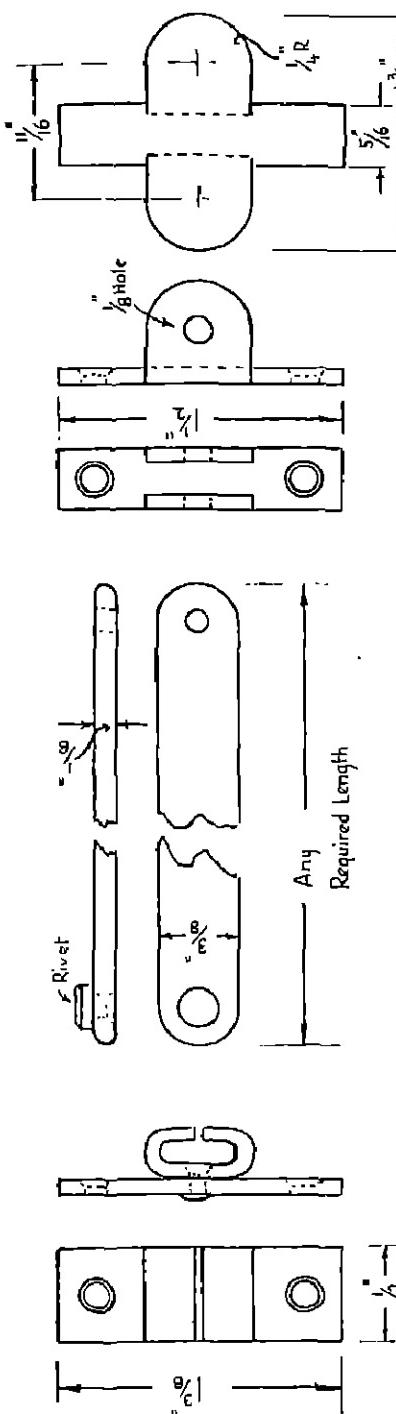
WORKING DRAWINGS OF CABINET FITTINGS
